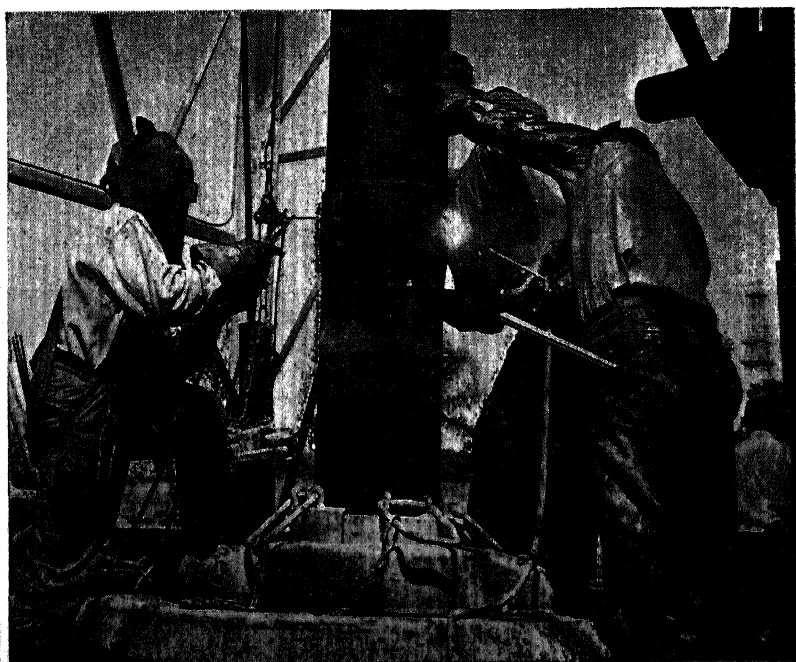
Welding 14 5/8" casing near Los Angeles, Calif. Three welders complete the bell and spigot type joint in about 5 minutes.
